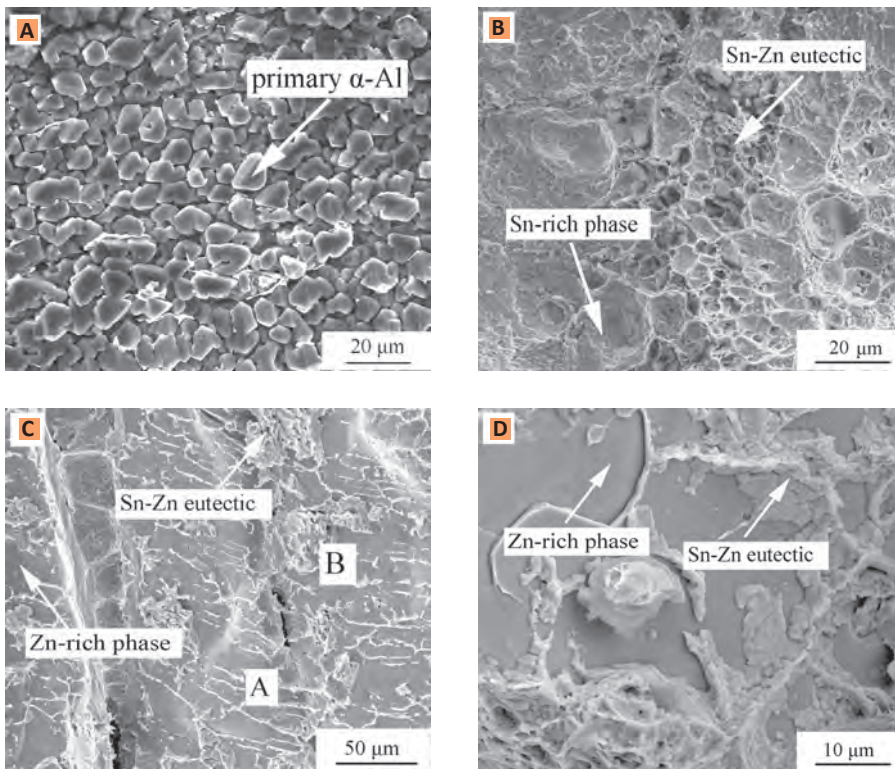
Fracture surface of joints soldered with A — pure Sn; B — Sn-4Zn; C — Sn-9Zn; D — Sn-20Zn.
